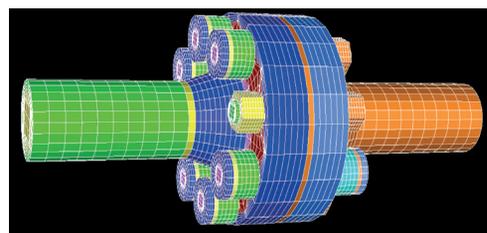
A Compact weld-neck flange exposed to jet fire.
